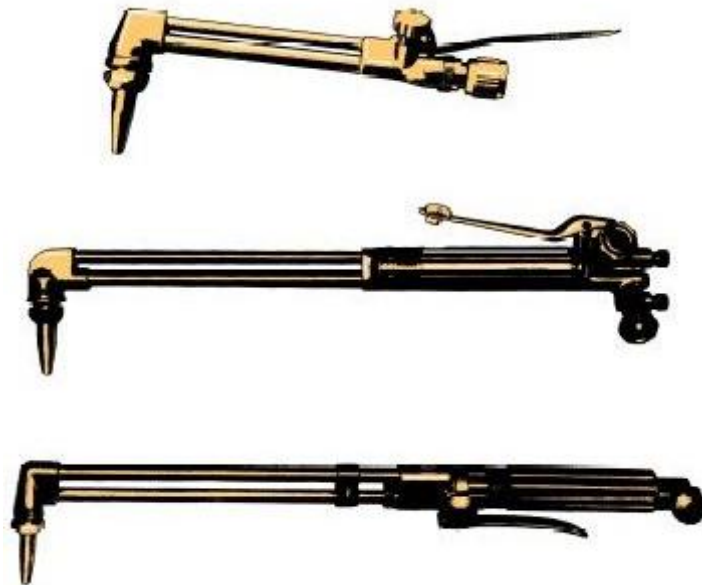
A full-size oxygen cutting torch which has all valves located in its rear body. Fig. 1-7. Another style of cutting torch, with oxygen valves located at the front end of its handle.
